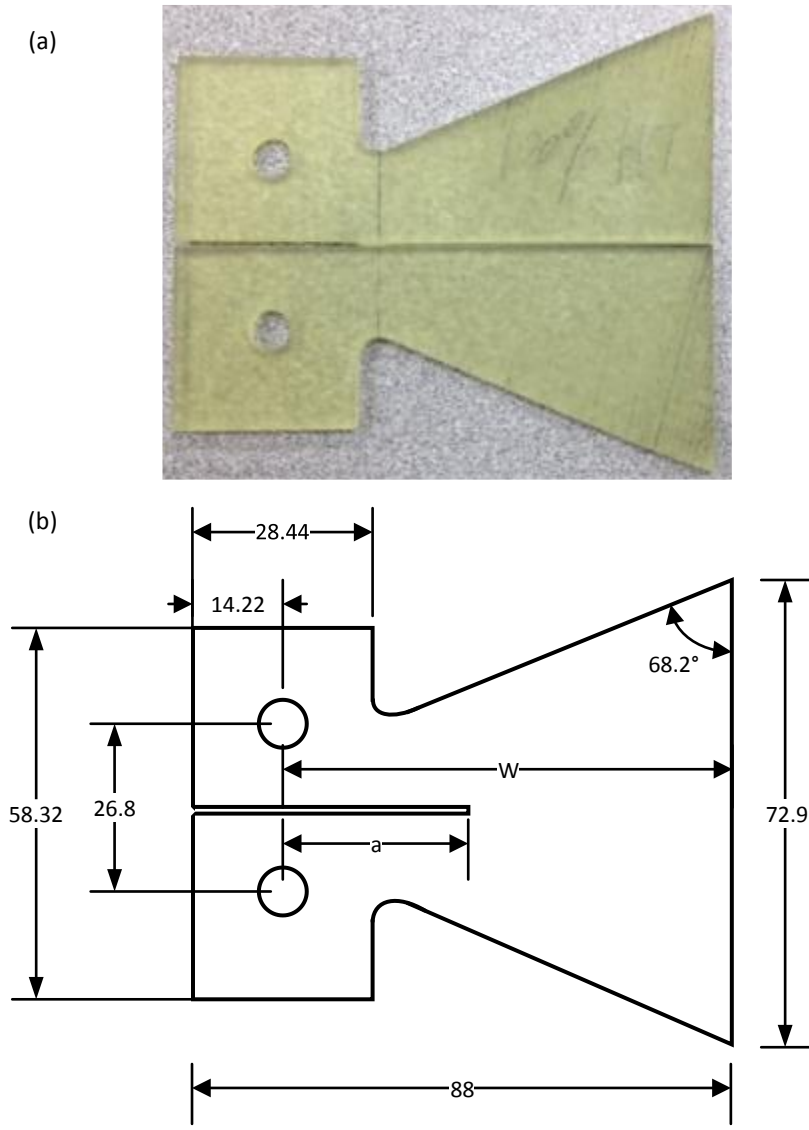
(a) Homogeneous TDCB specimen (100% HT), (b) A schematic drawing showing the dimensions of the TDCB specimen used in this thesis. Units: mm
